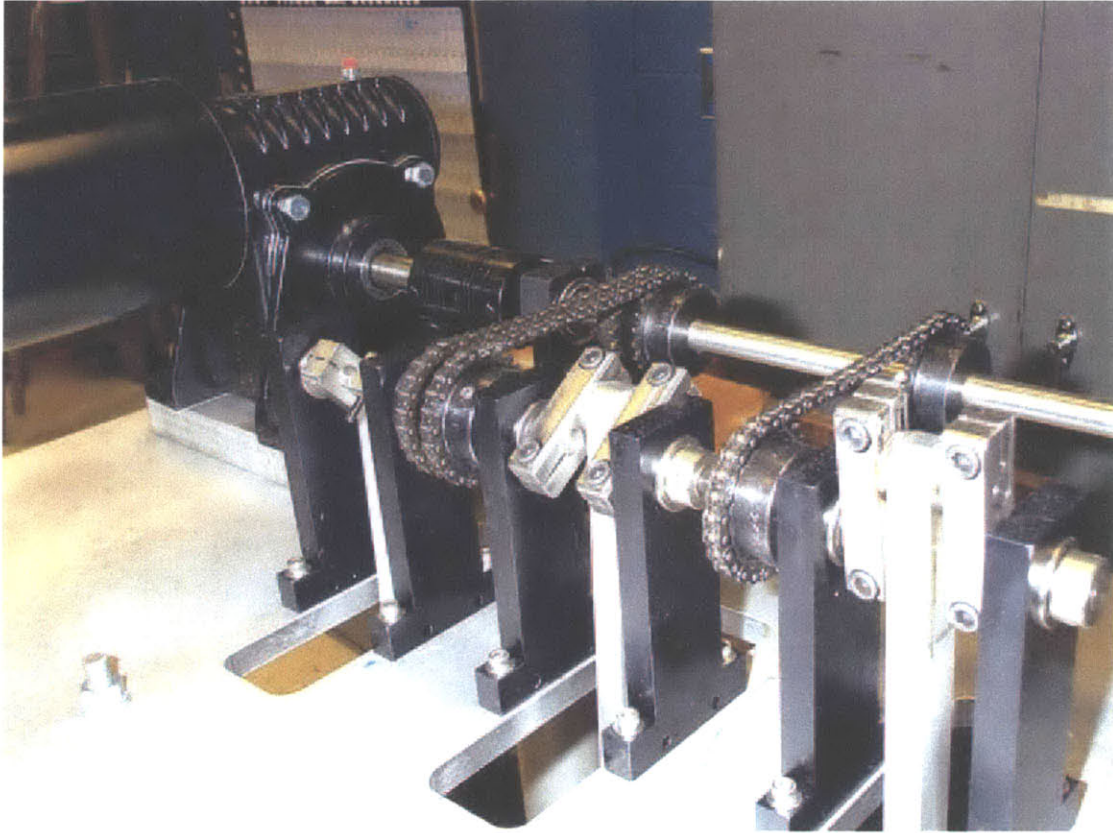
Close-up photograph of the drive mechanism. At left is the 1/3 HP DC motor connected to the 1/2 – inch drive shaft by a flexane coupling. Each set of crank arms is connected to the drive shaft through a chain-link around equal diameter sprockets.
